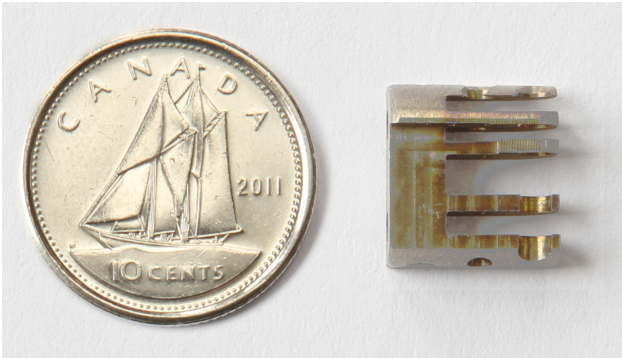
Jaw holder machined with wire EDM and CNC mill.
